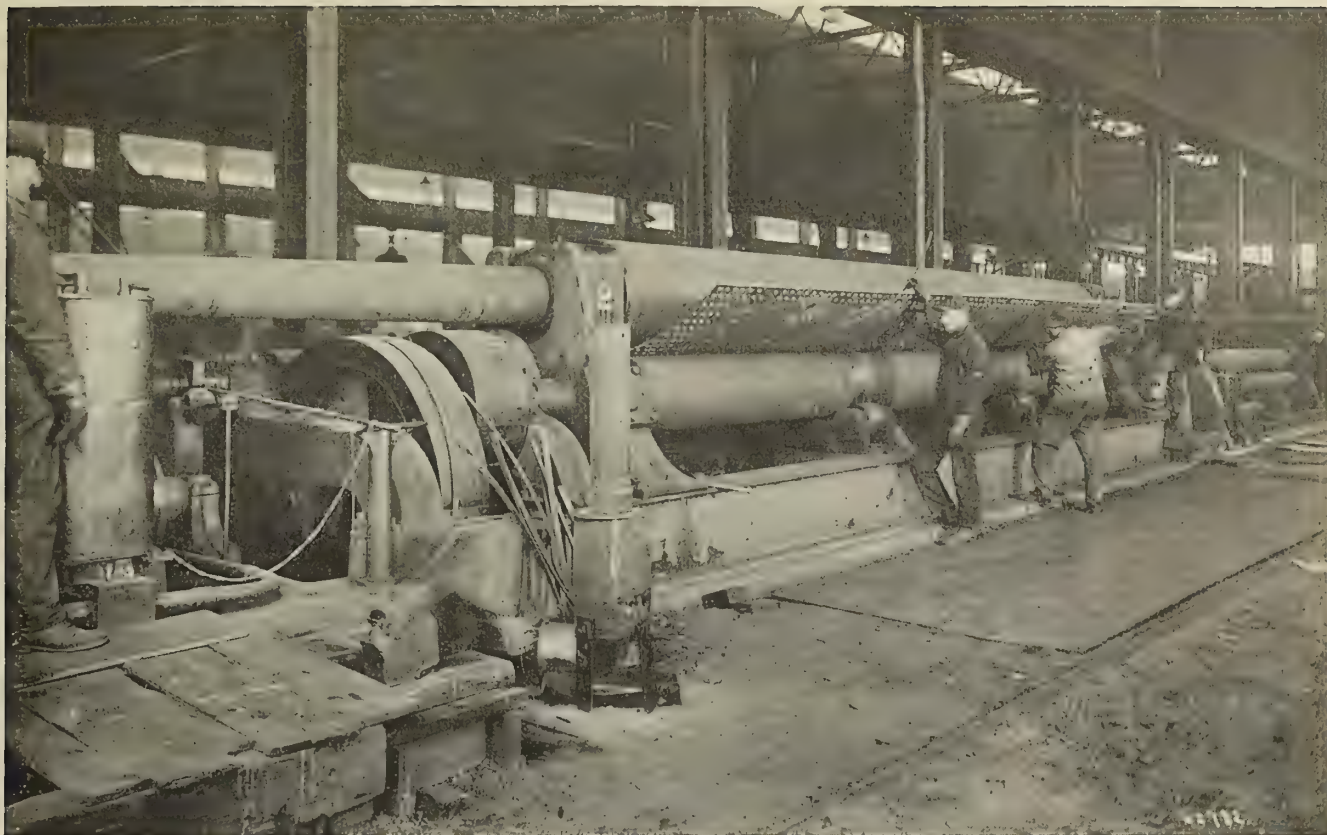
Bending Plates After Punching and Shearing Are Completed
